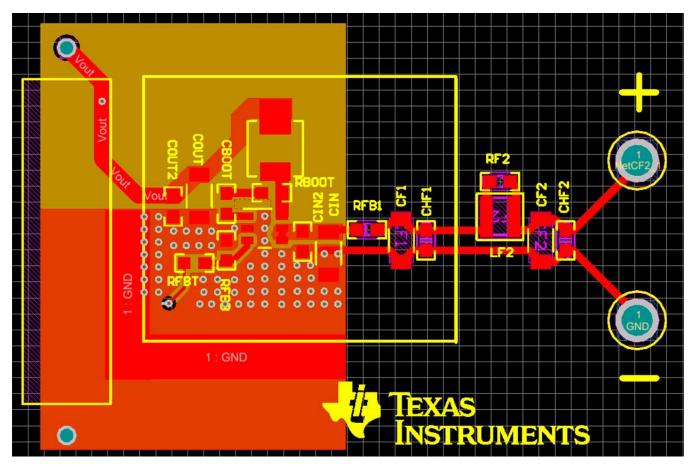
Buck Converter PCB with 2-Stage EMI Filter
